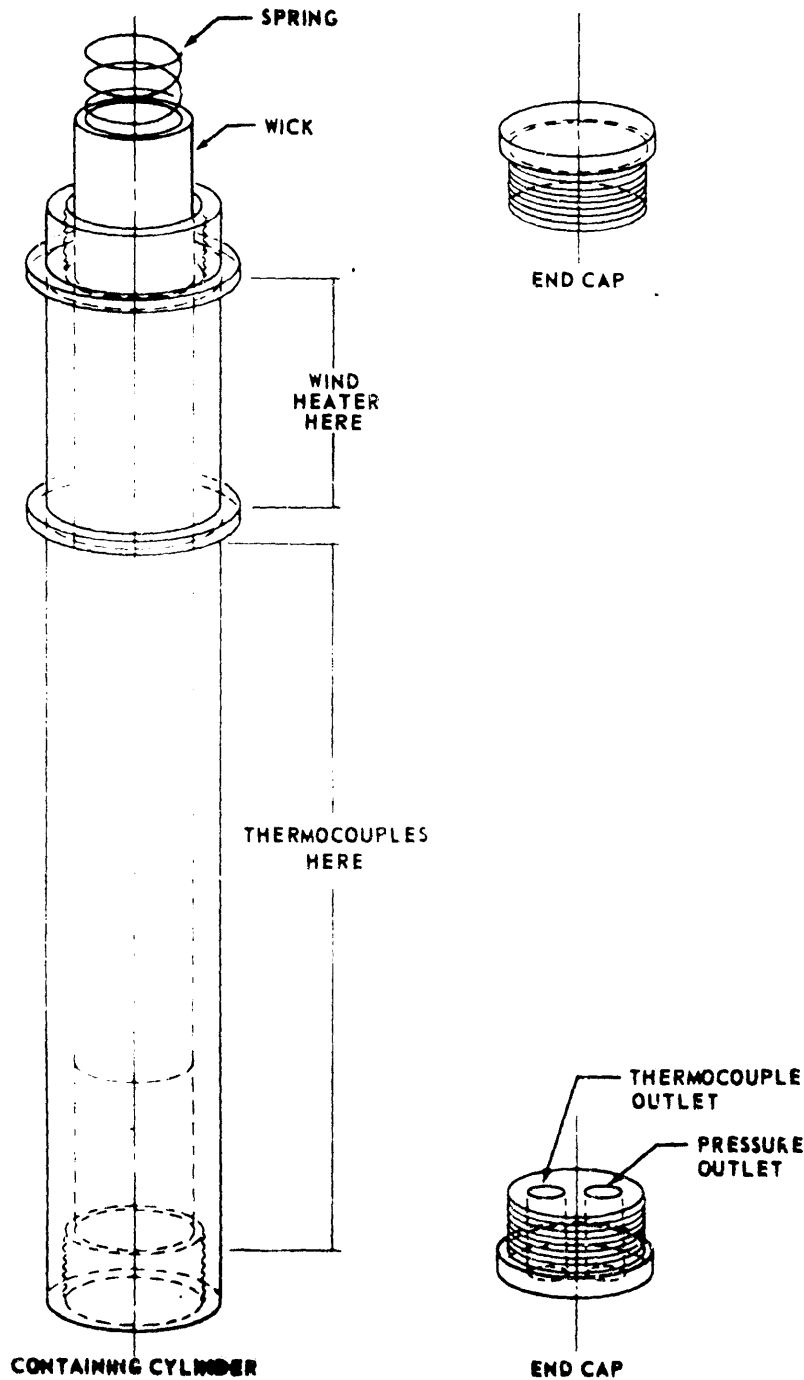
HEAT PIPE PARTS (RADIATING FIN)
